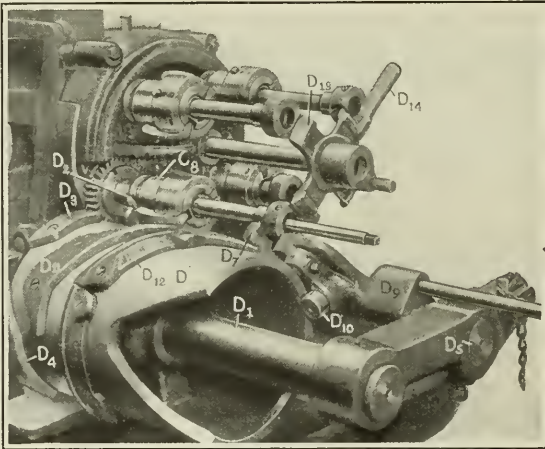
End View of Machine, showing Feed Pusher withdrawn
